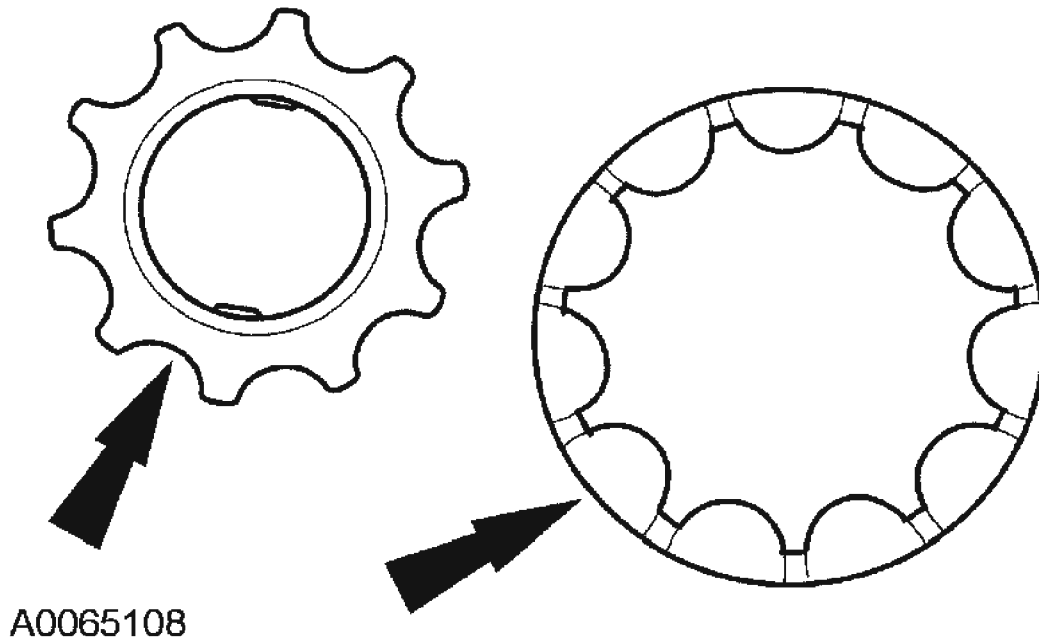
Inspecting Pump Gears Of Nicks, Scratches Or Gouges
